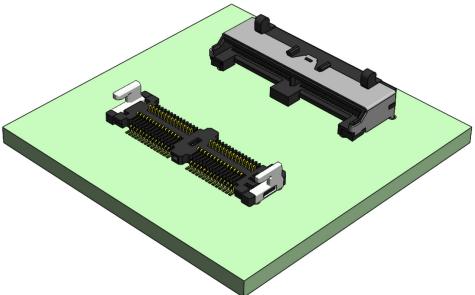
Isometric View of x16 Connector Solution Set on the Host PCB
